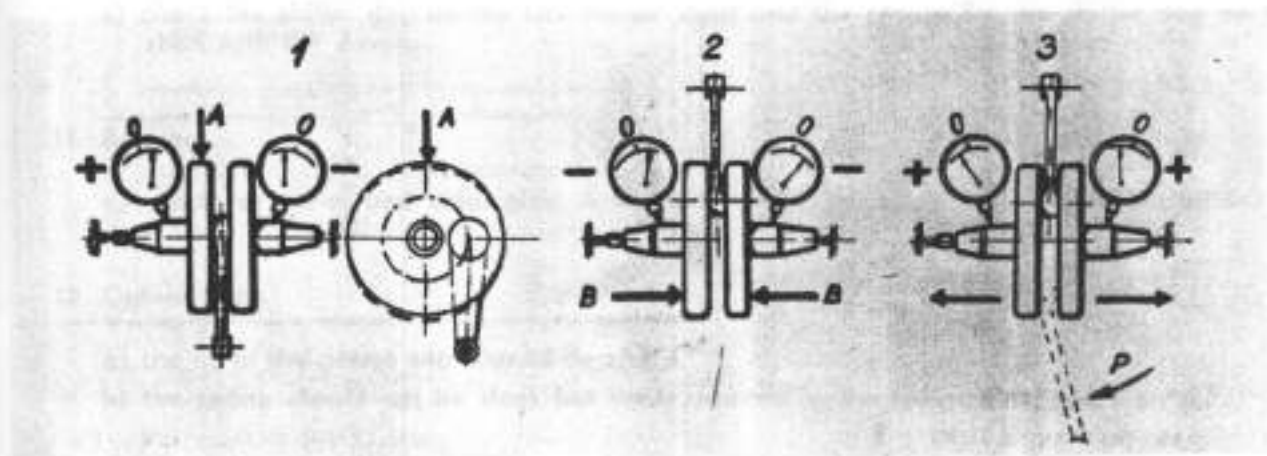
, b, c - Flywheel adjustment (turning), setting apart and pressing together of the flywheels.
